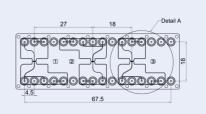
Detailed schematic drawing droplet generator chip Fluidic 1032 – channel dimension
